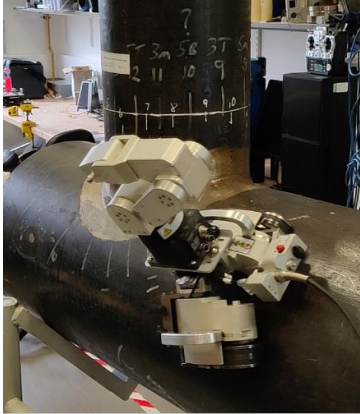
CRAWLER POSITIONED TO INSPECT SADDLE WELD
